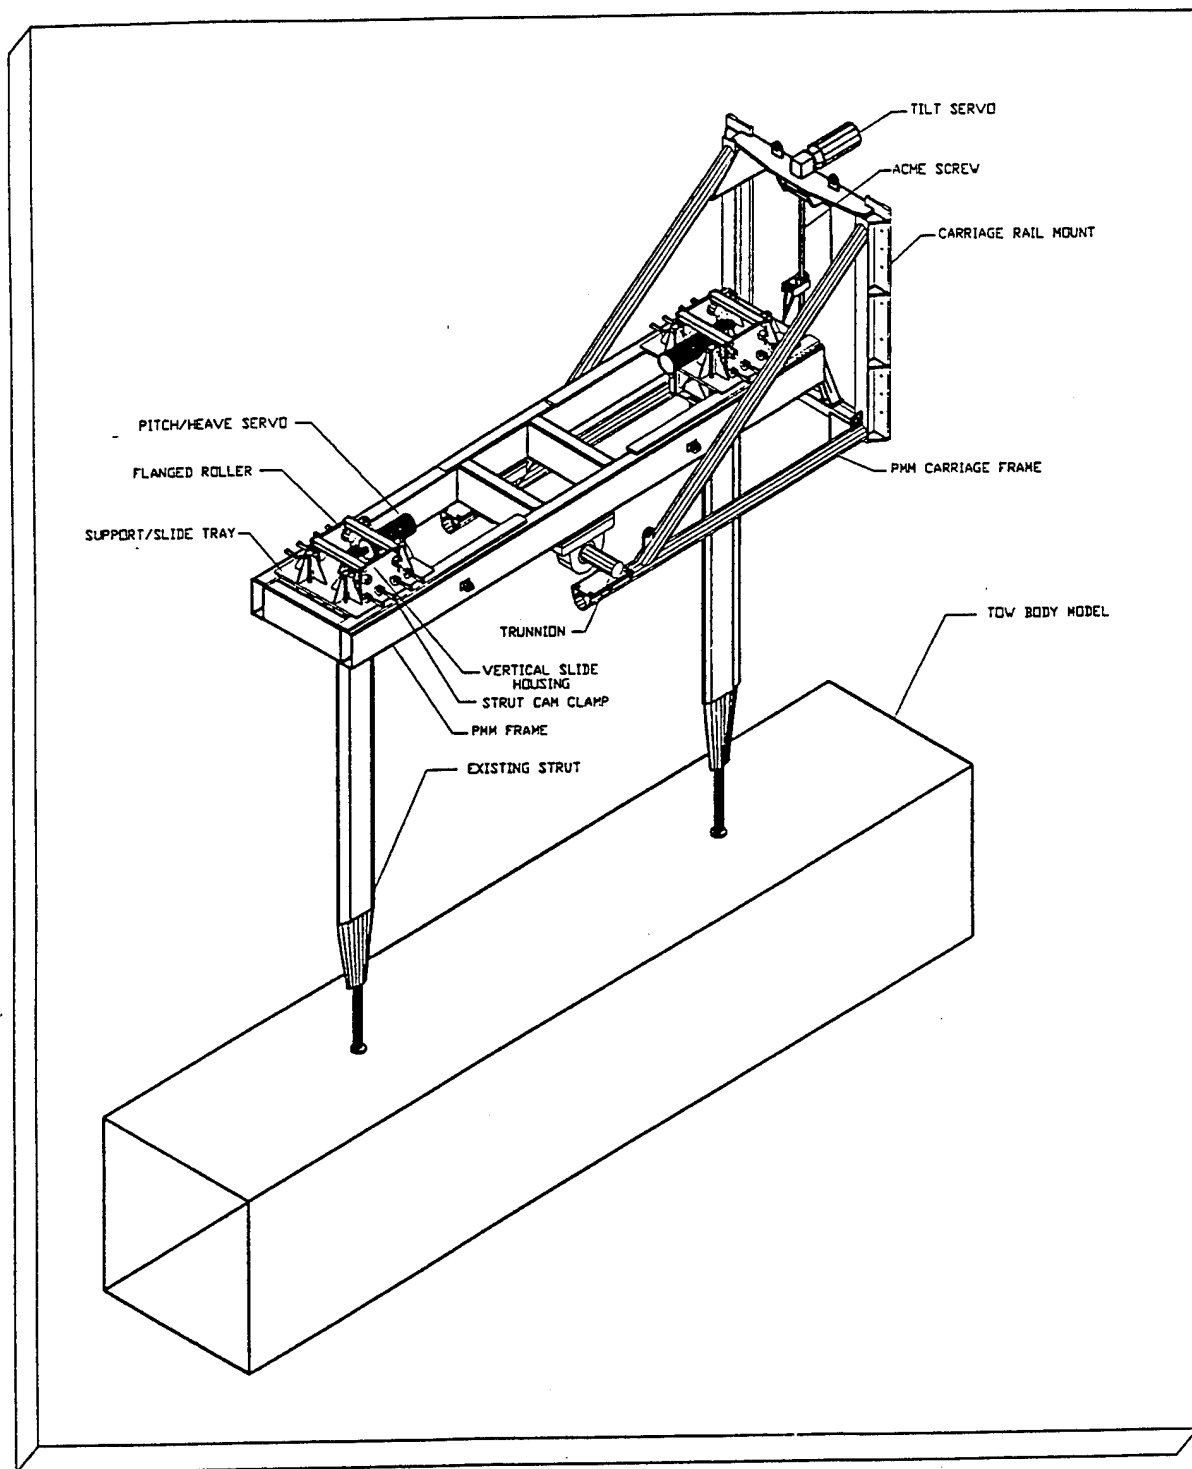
Sketch of a preliminary design of a new Planar Motion Mechanism.
